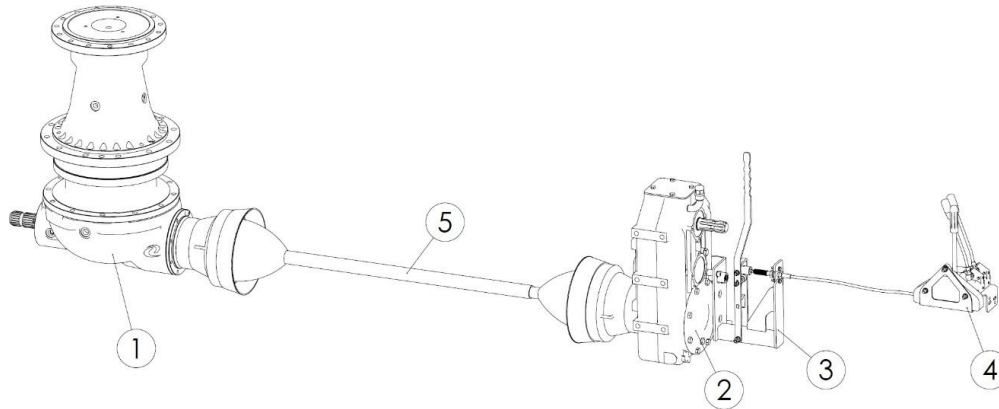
Transmission system with a two-speed gear: 1 - planetary gear, 2 - two-speed gear, 3 - gear changing mechanism, 4 - gear change lever, 5 - intermediate drive shaft
